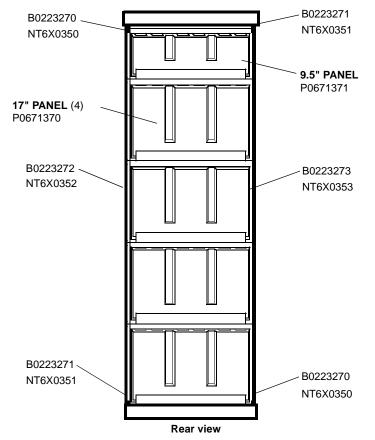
NT8T5055, 27" Bay Rear Cover Assembly Kit
